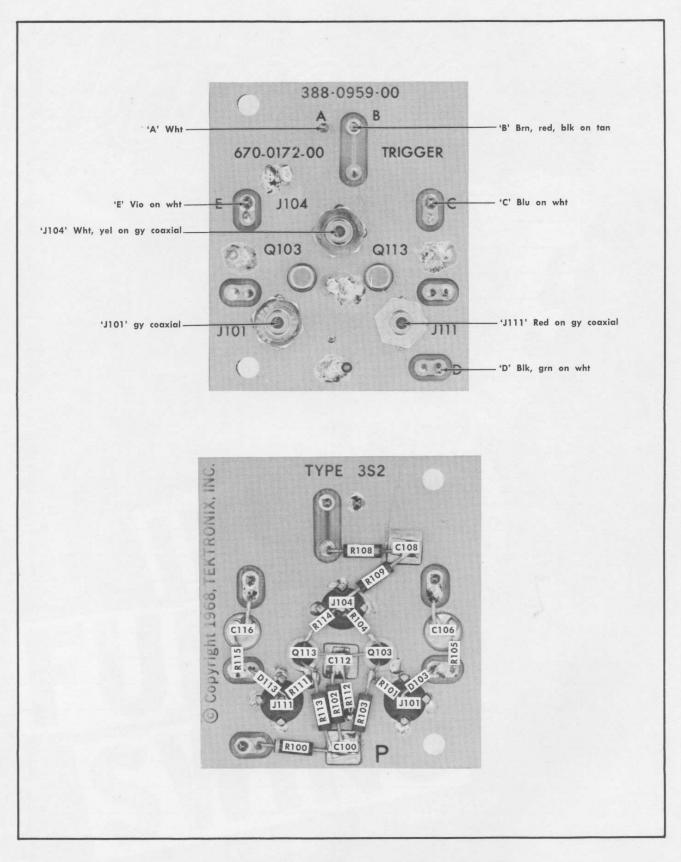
Trigger circuit card assembly, SN B010101 - SN B030249.
